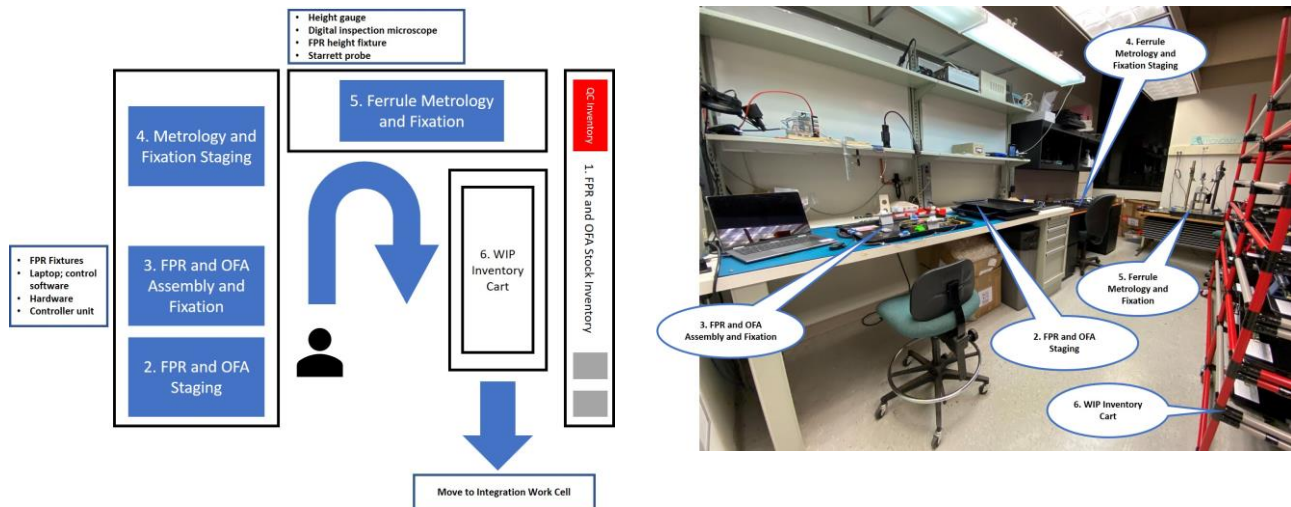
FPR-OFA functional work cell. Left: Schematic layout showing sequenced Ops and required equipment and fixtures. Right: Completed work cell cross-referencing elements shown in the schematic layout. FPR and OFA Stock Assembly Inventory not shown.
